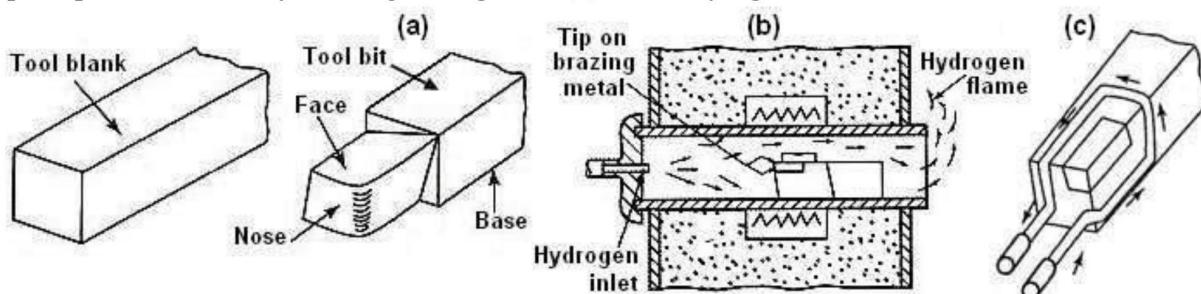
(a) Forged tool (b) Furnace bracing of a tool tip (c) Induction brazing of a tool tip
